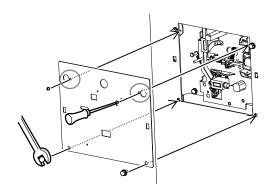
Fix the front plate onto panel with two (2) M8 bolts and two (2) M4 screws removed at step shown in Fig. 8.
